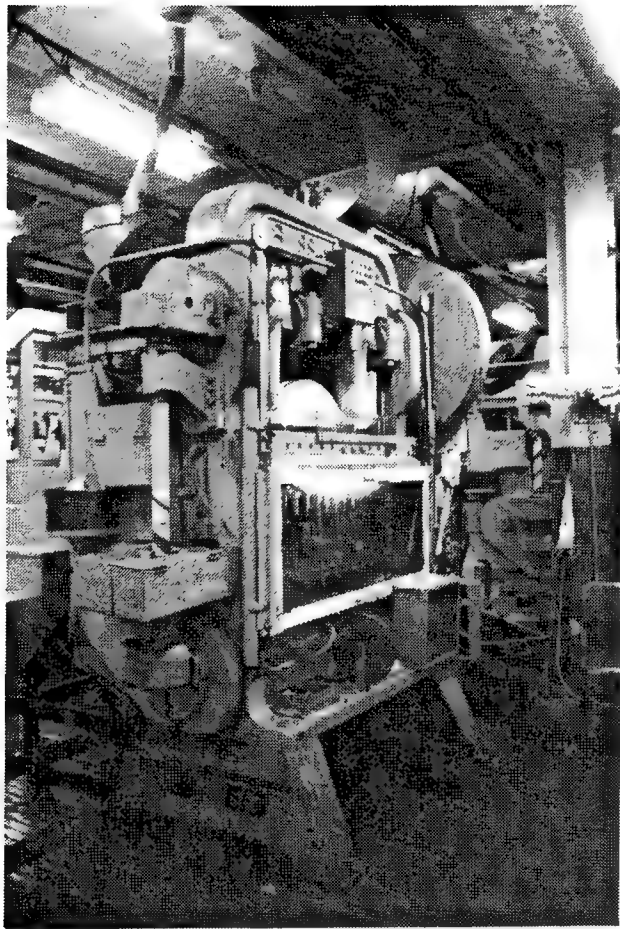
Building 3: Bullet Assembly Press manufactured by E. W. Bliss Co.
